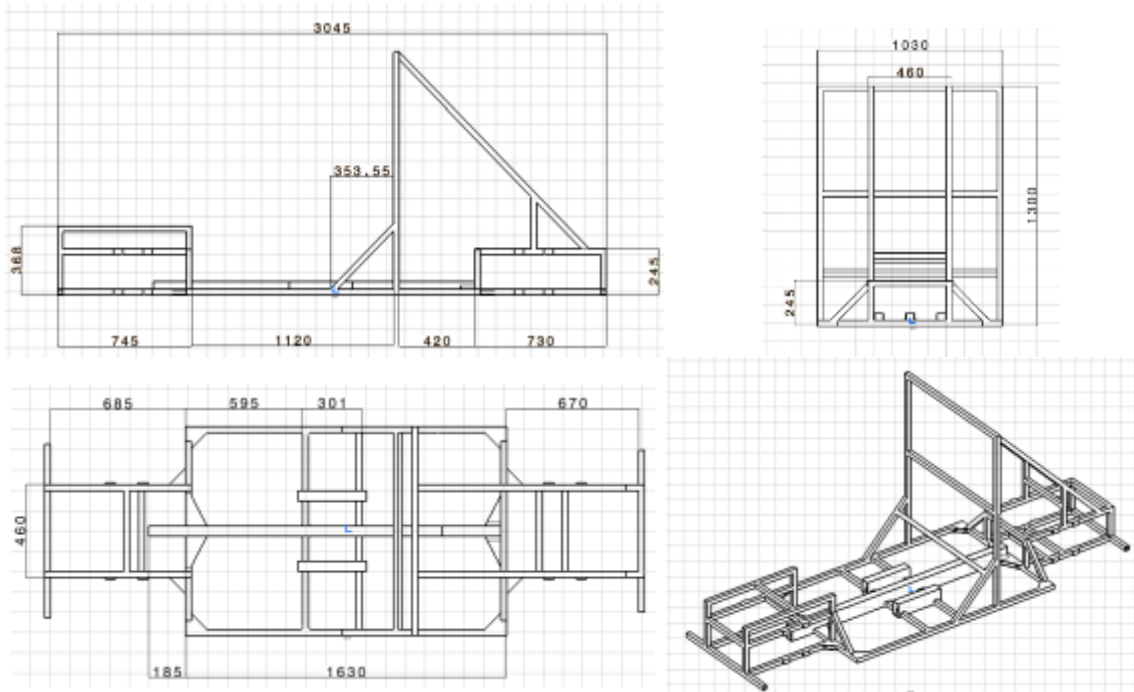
Dimensions of the frame in millimeters. Top left- Side view; Top right- Front view; Bottom left- Top view; Bottom right- Isometric view
